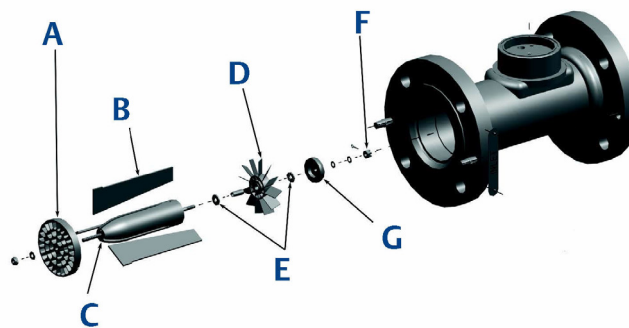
Internal Assembly for a Nominal Pipe Size DN80 to DN100 (3-in to 4-in) Liquid Turbine Meter
